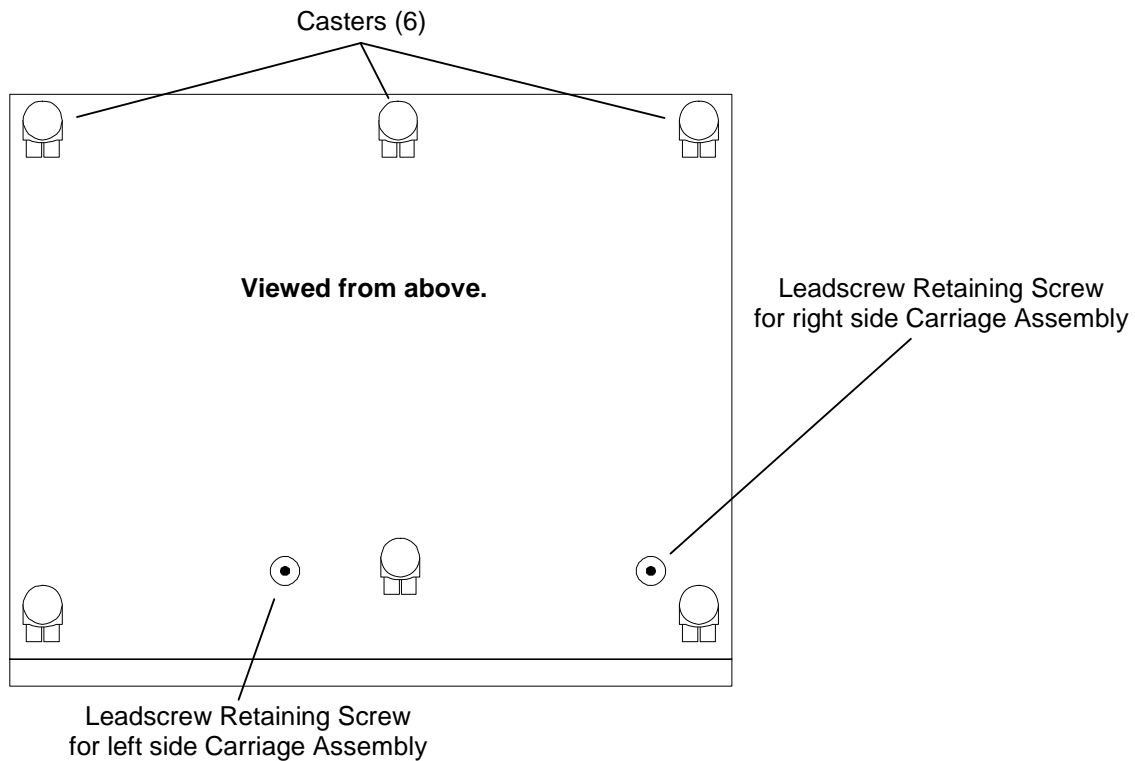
Dual Bay TLS Cabinet – Bottom View
